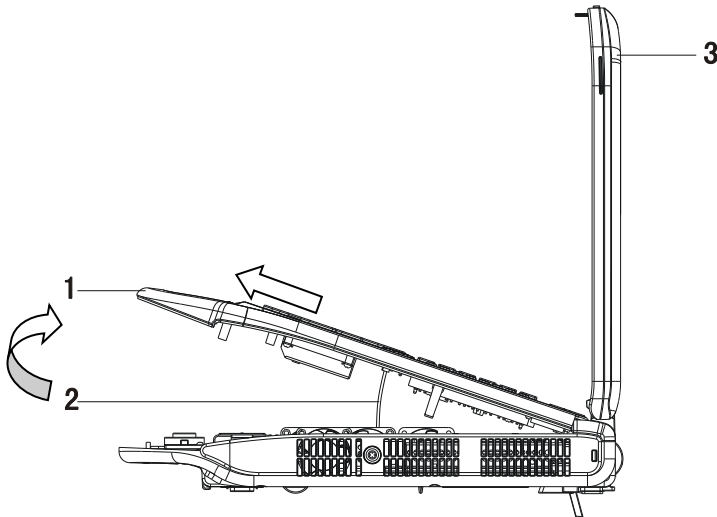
Removing the Top Cover Assembly of Main Unit (2)
